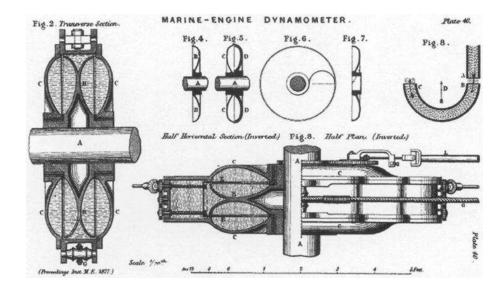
Original drawing, section of the rotor. (First published by the Institute of Mechanical Engineers in 1877)
